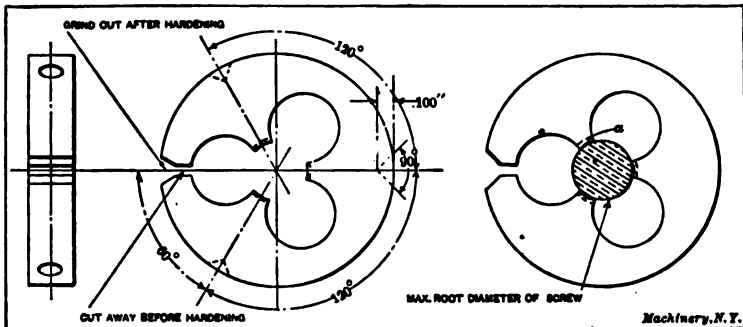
General Dimensions and Design of Approved Type of Adjustable Round Split Button Die
